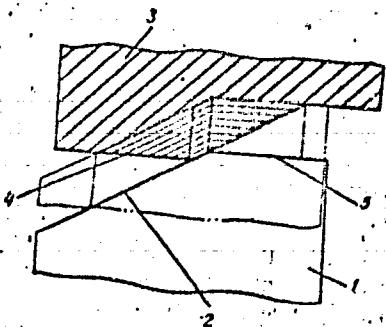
1 - tool bit; 2 - first cutting blade; 3 - product; 4 - zone of outer layer removal; 5 - second cutting blade
